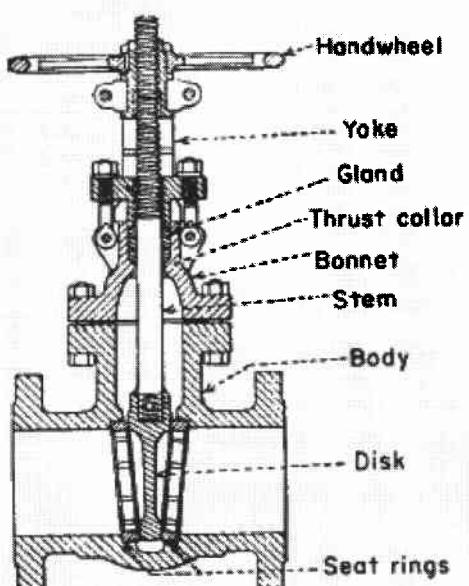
Rising-stem solid-wedge gate valve for 2 psig steam service.
